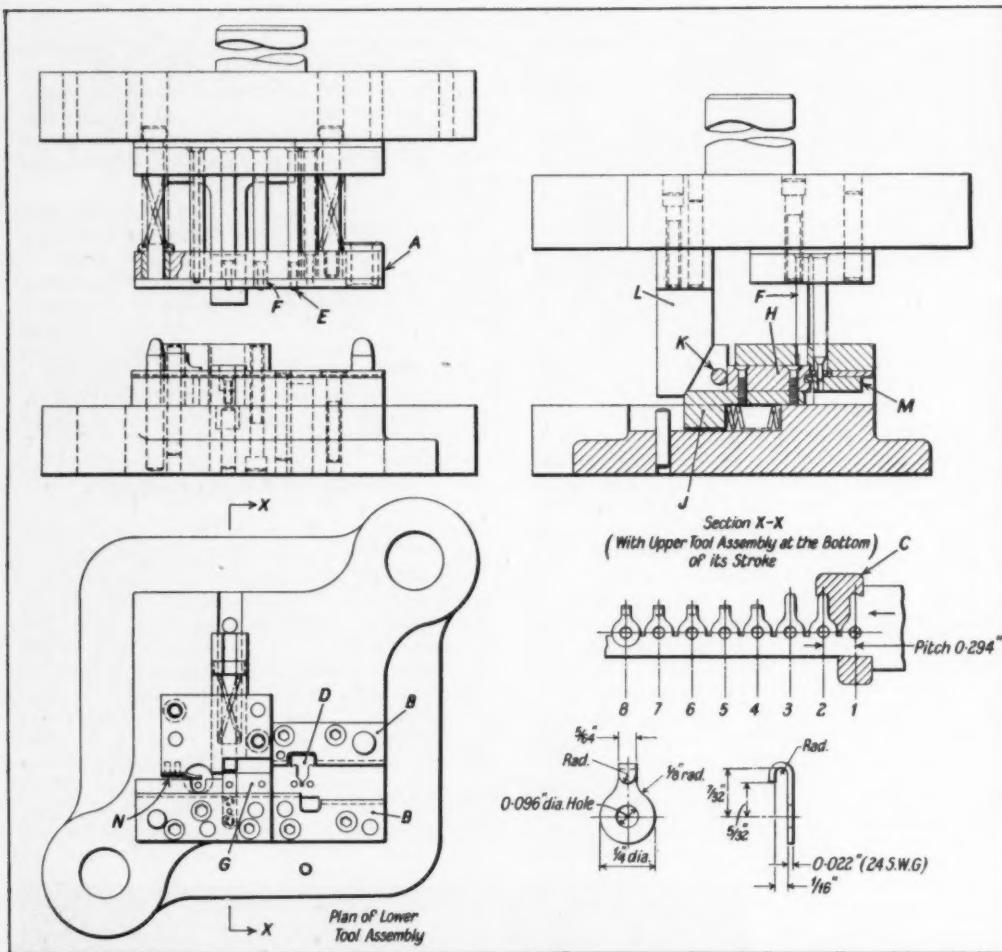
The Multi-stage Tool for the Production of the Spring Anchor Seen in Fig. 1. A Diagrammatic Layout of the Operation Stages, and a Drawing Giving Details of the Workpiece are Inset
